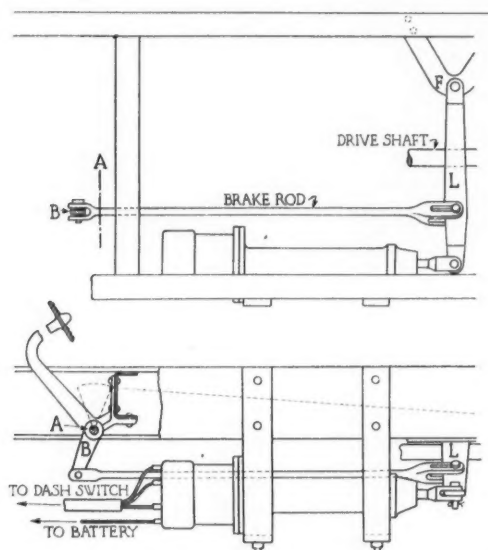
Plan and side elevation of the electric and foot brake operating mechanism
